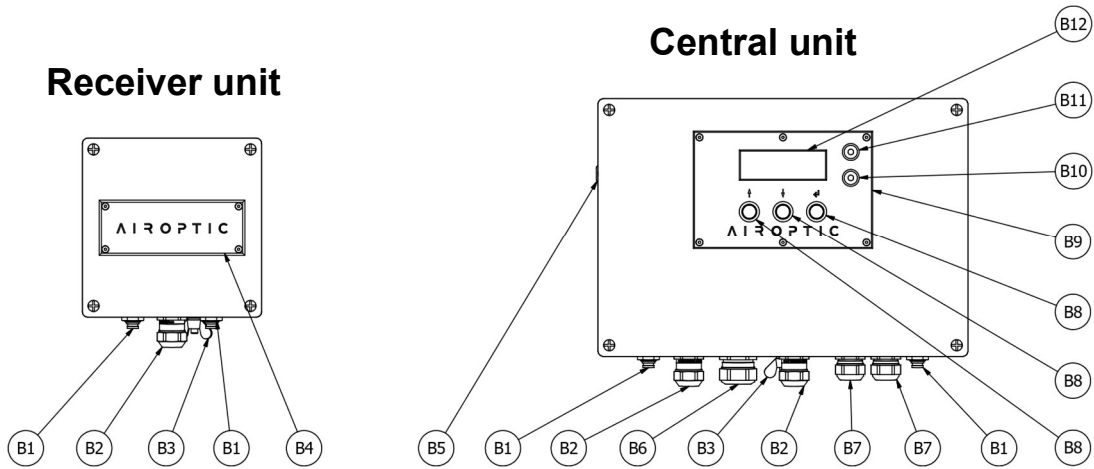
GasEye Cross Duct SG instrument assembly.
